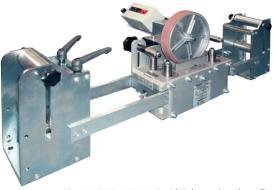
MESSBOI 40 BAE with inlet and outlet roller cages
